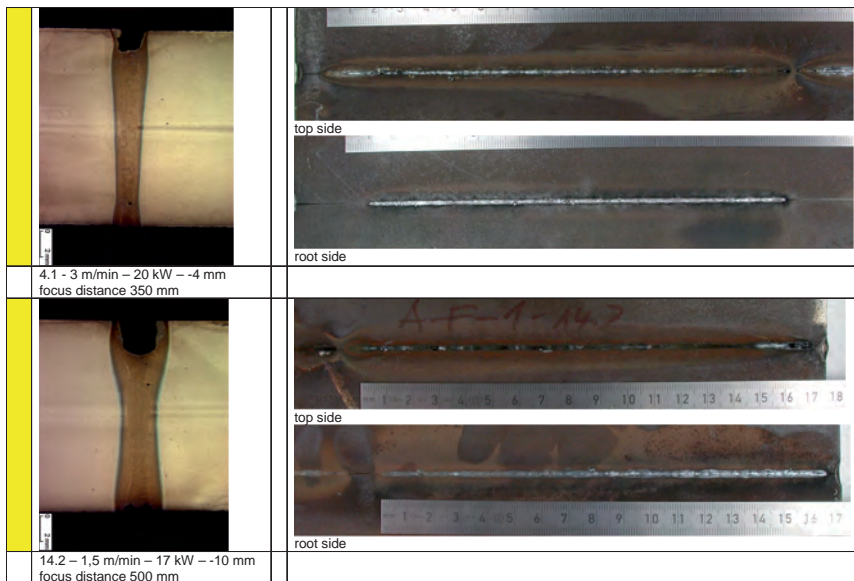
Characteristic view of the welding defects appeared during 16 mm mild steel plate welding with fiber laser [90]
